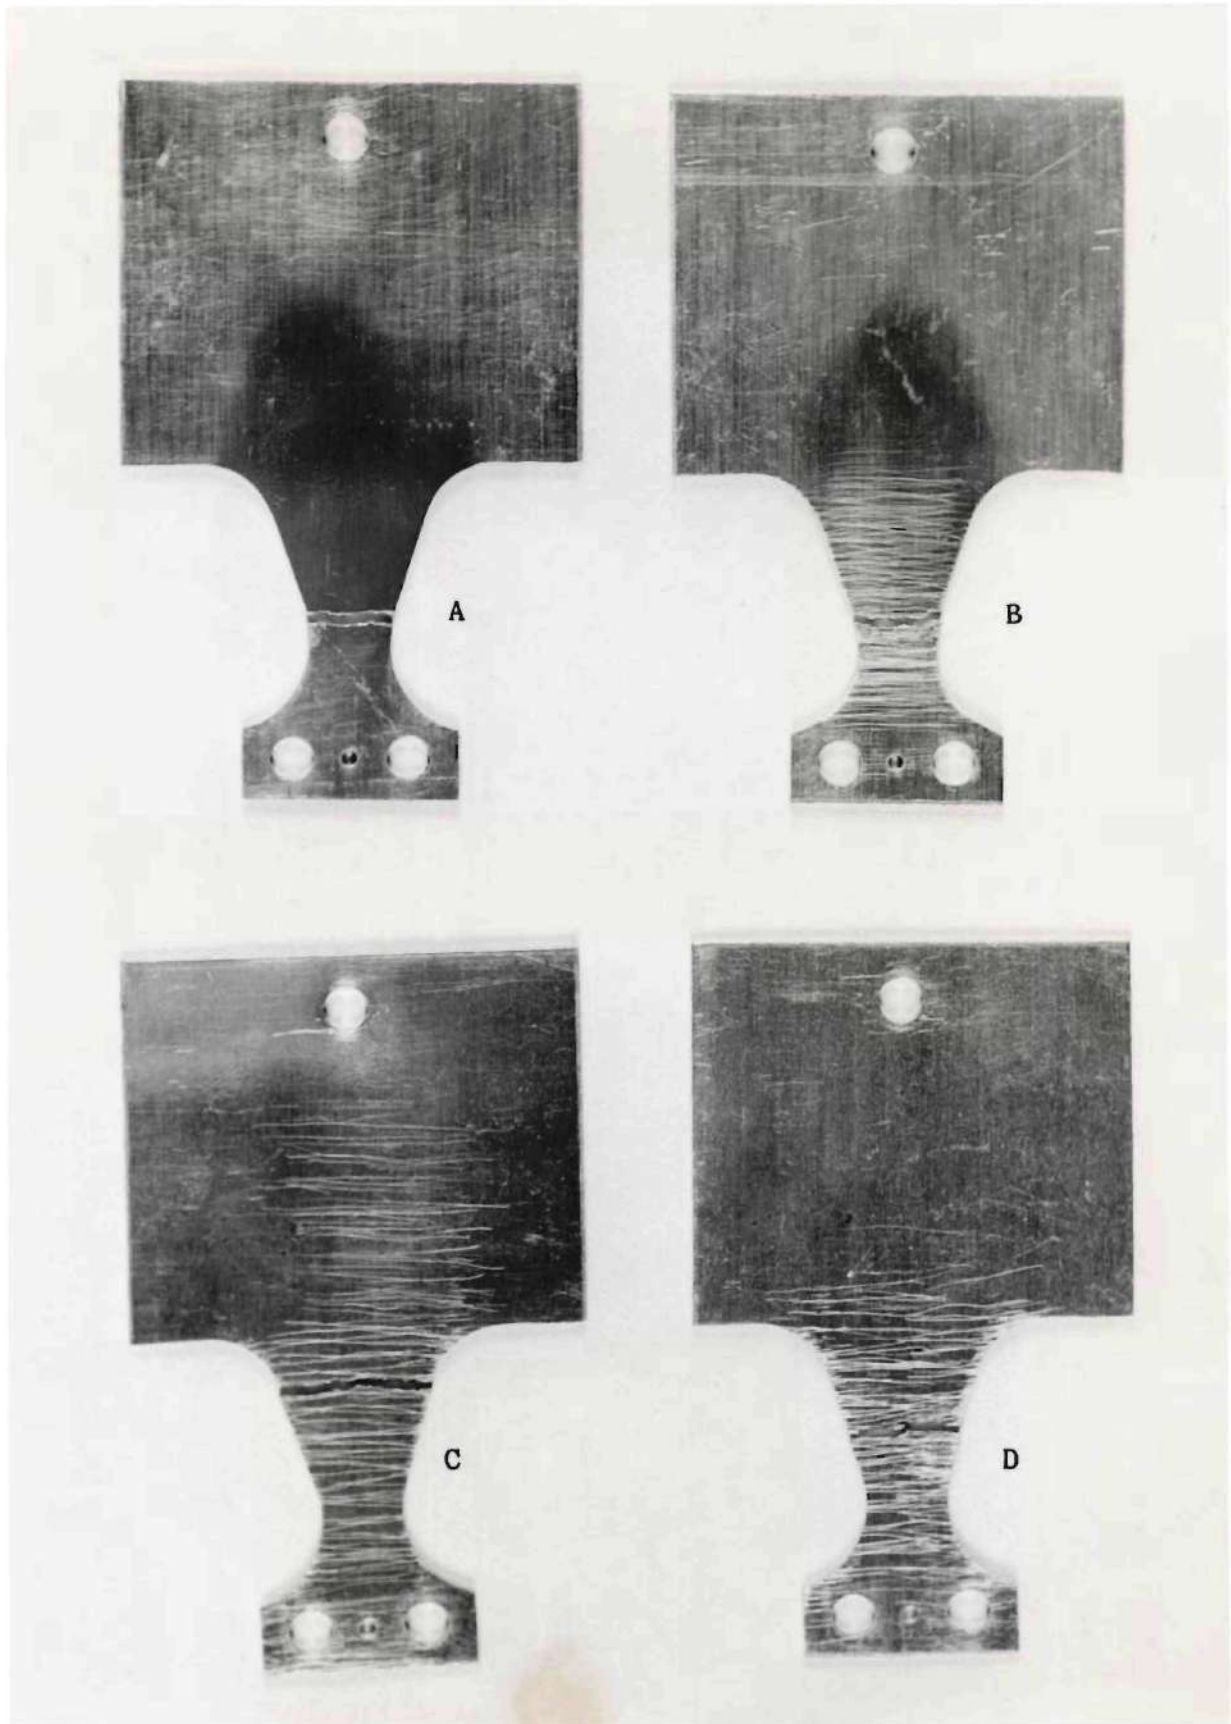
FRACTURED ALCLAD 75S-T6 SPECIMENS, SURFACE FINISH:
